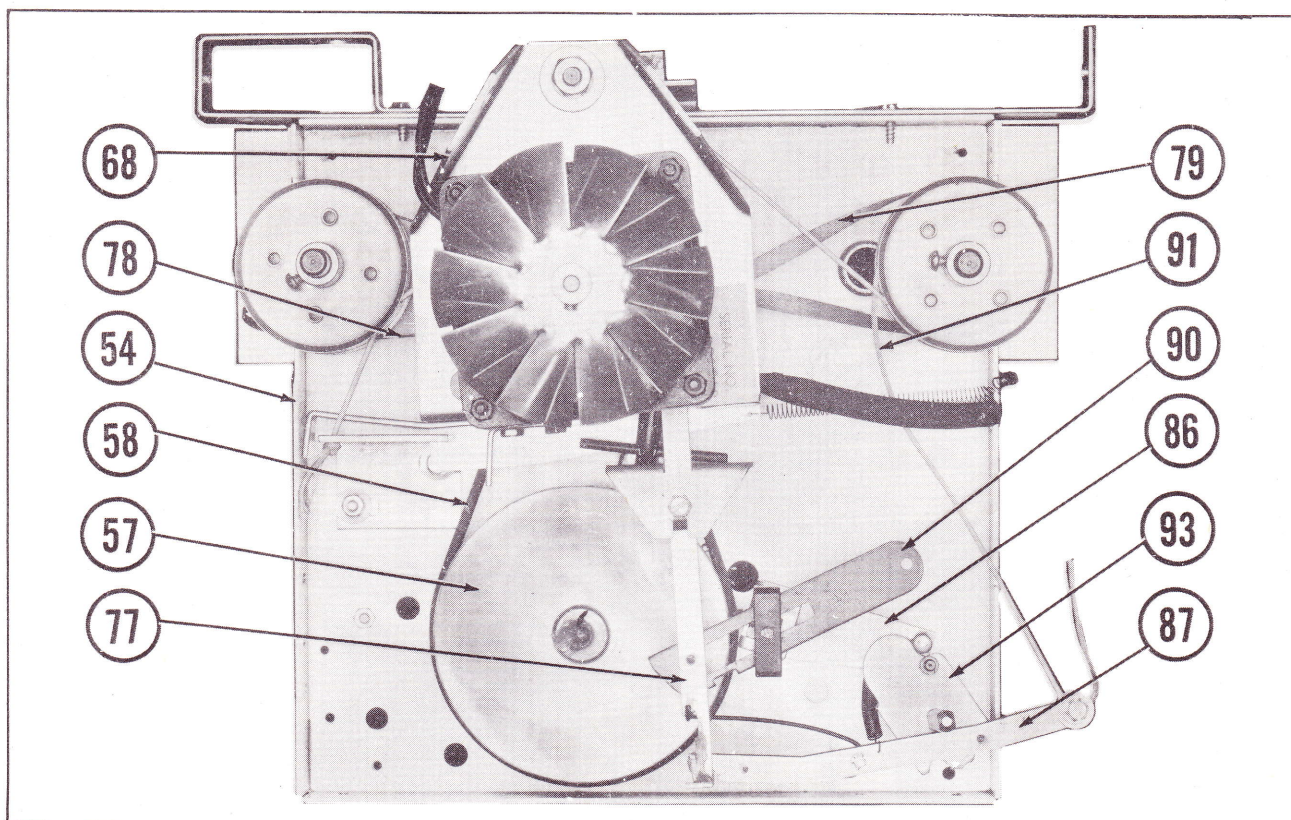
BOTTOM VIEW OF MECHANISM WITH MOTOR BOARD SUB PLATE REMOVED
